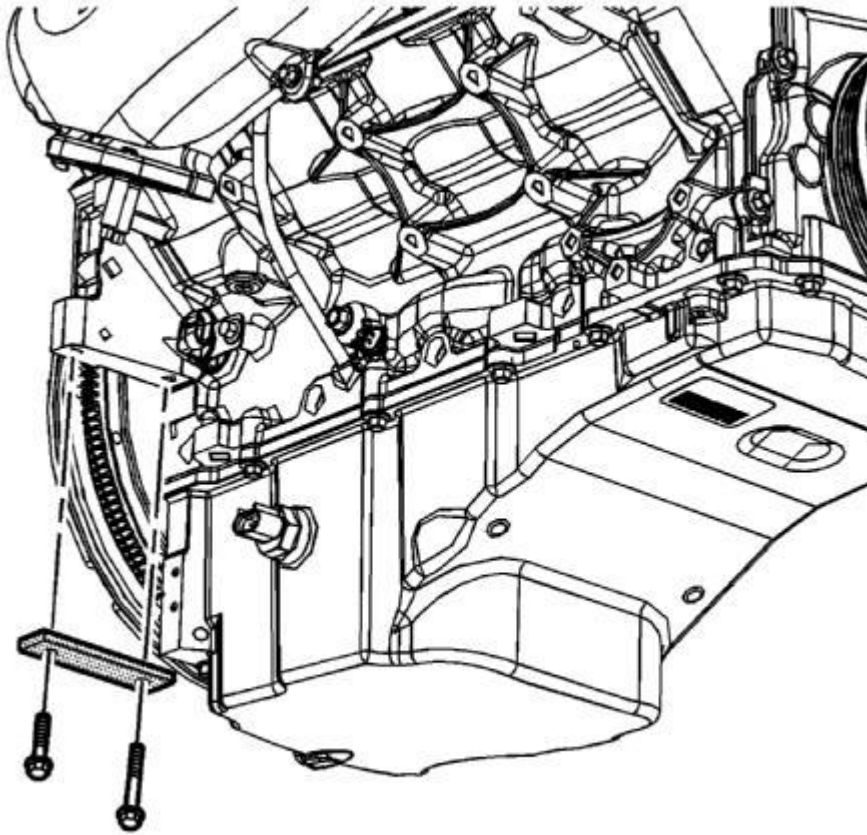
Identifying J 42386-A Flywheel Holding Tool
